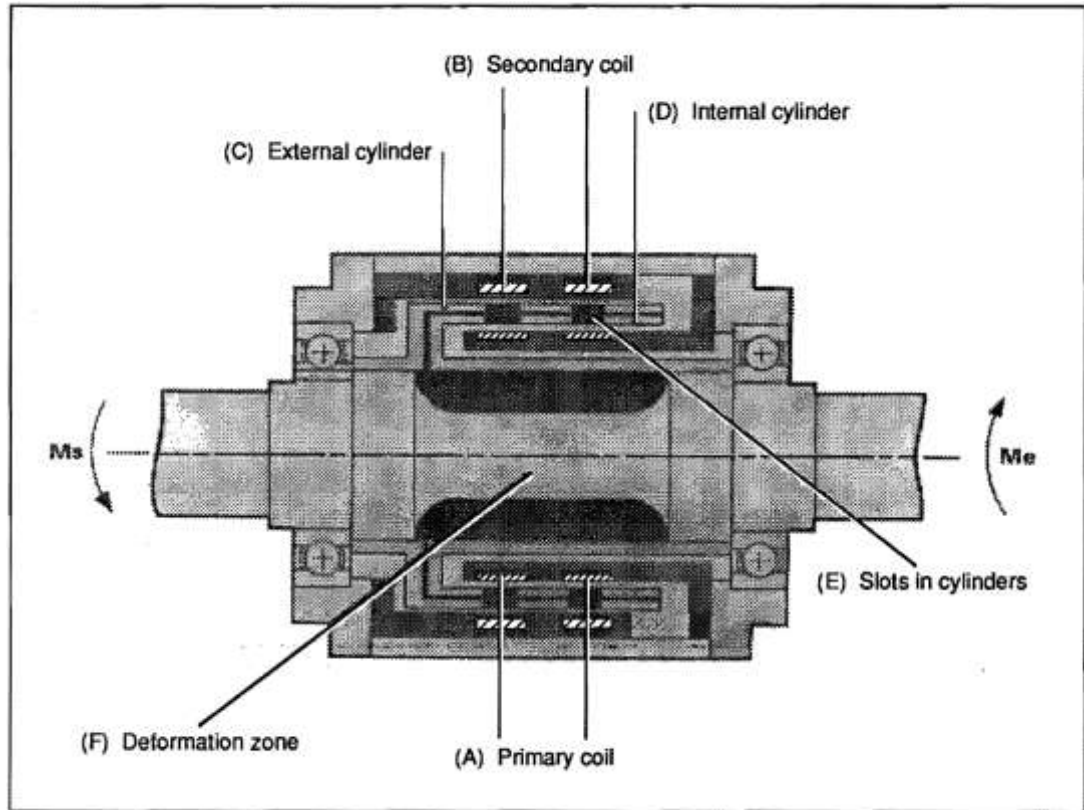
Diagram showing Torquemaster TM 112 torquemeter unit (courtesy of Vibro-Meter).
